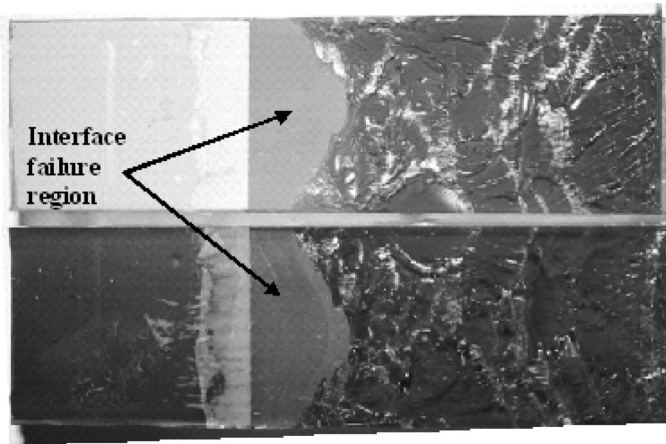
Fractured MDCB specimen shows pure interfacial fracture.
